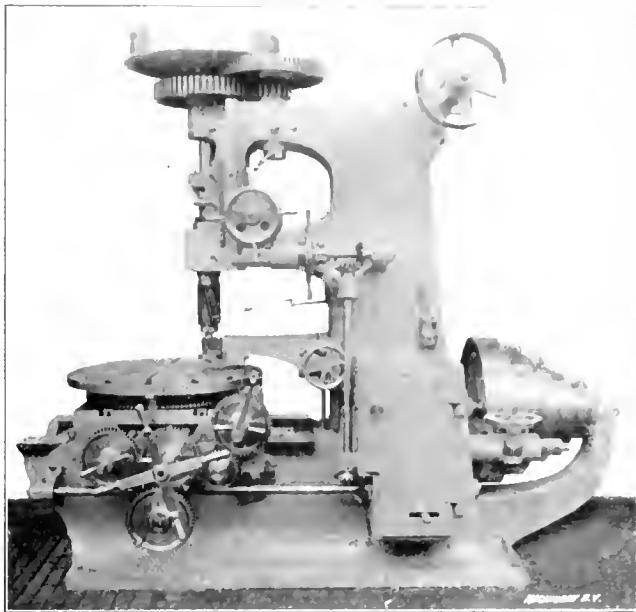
Belt-driven Profiling and Vertical Milling Machine
